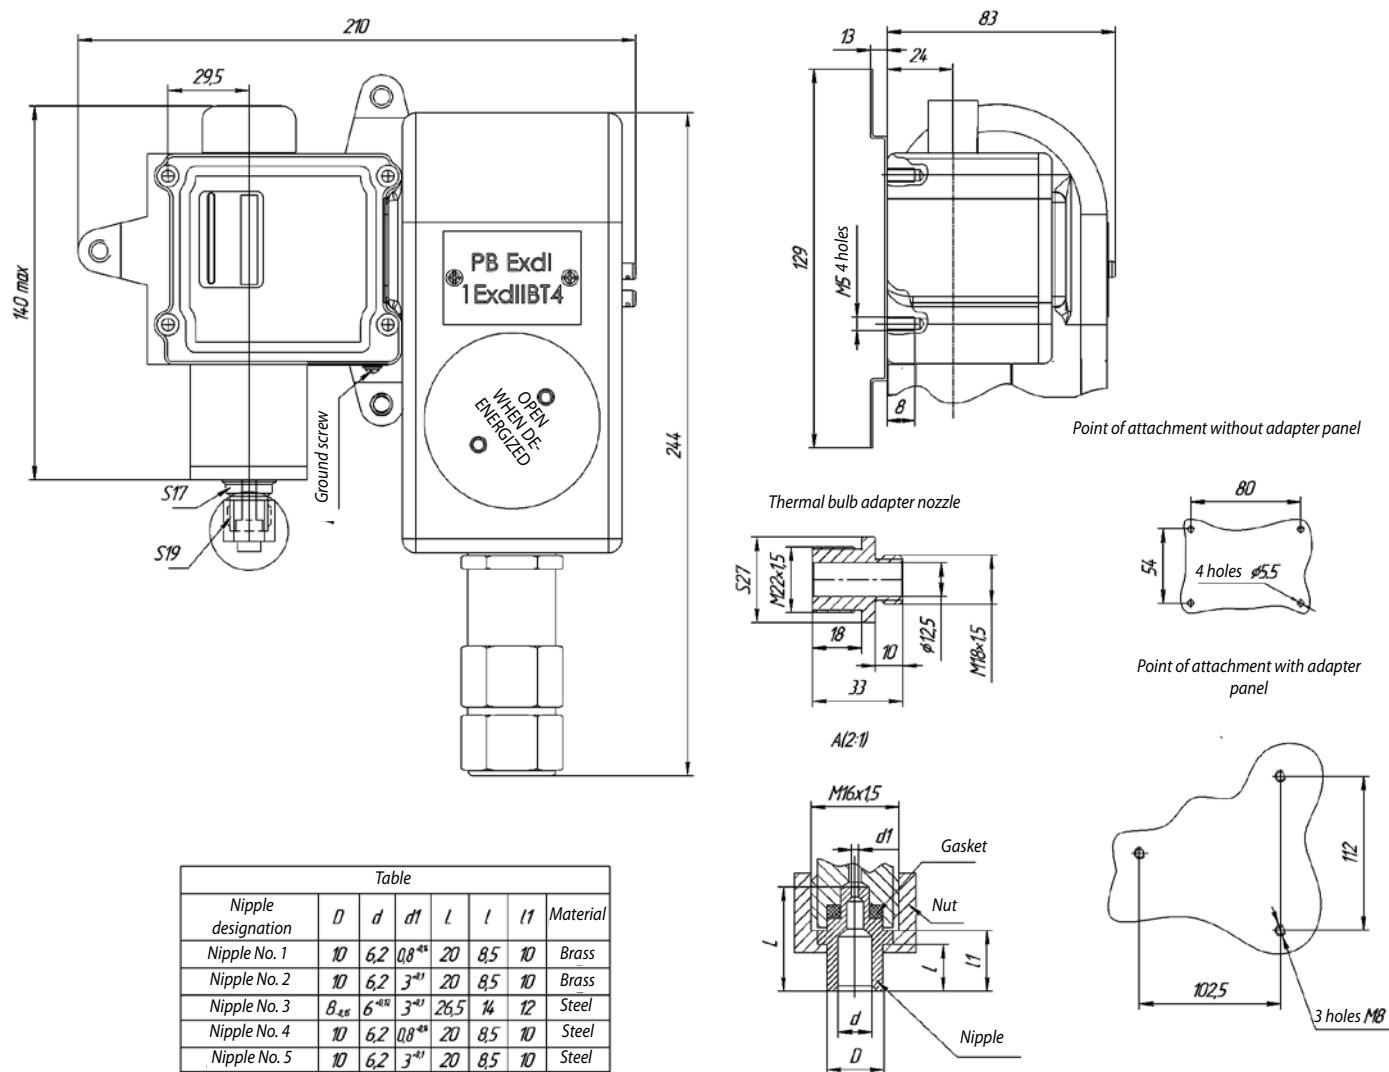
Overall and mounting dimensions of pressure switches ДДМВ-102
